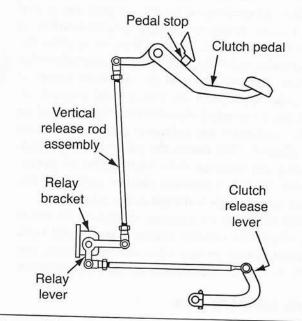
Clutch mechanical linkage used on a conventional truck chassis.
